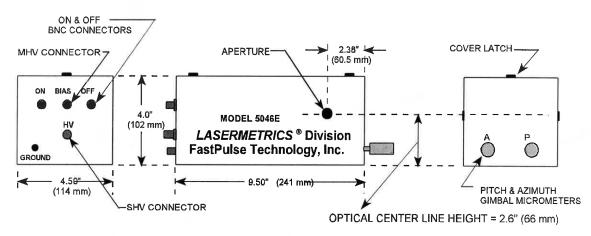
5046E SYSTEM — DRIVER MODULE / OPTICAL HEAD ASSEMBLY
